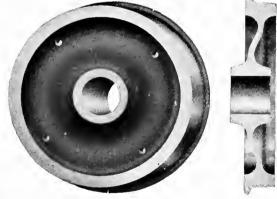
Cast Iron Plate Center, Held by Shrinkage and Shoulder.
